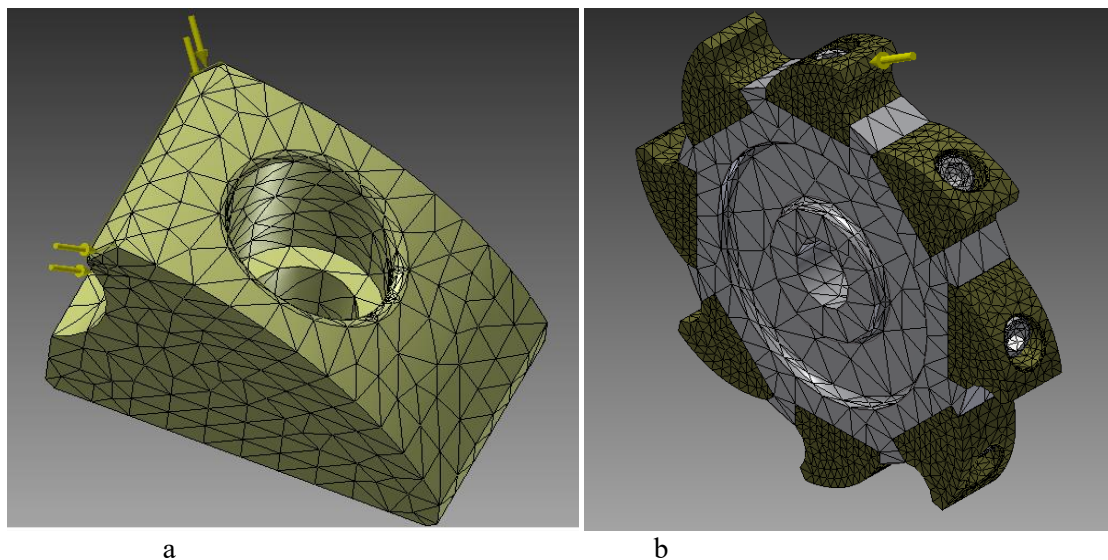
Solid-state 3D-models created in the software environment: a – 3D-model of the cutter insert; b – 3D-model of the assembled roller crusher disk mill.
